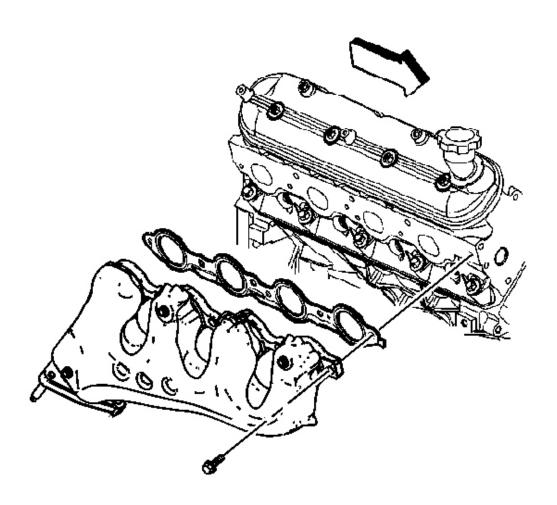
Exhaust Manifold Courtesy of GENERAL MOTORS CORP.
